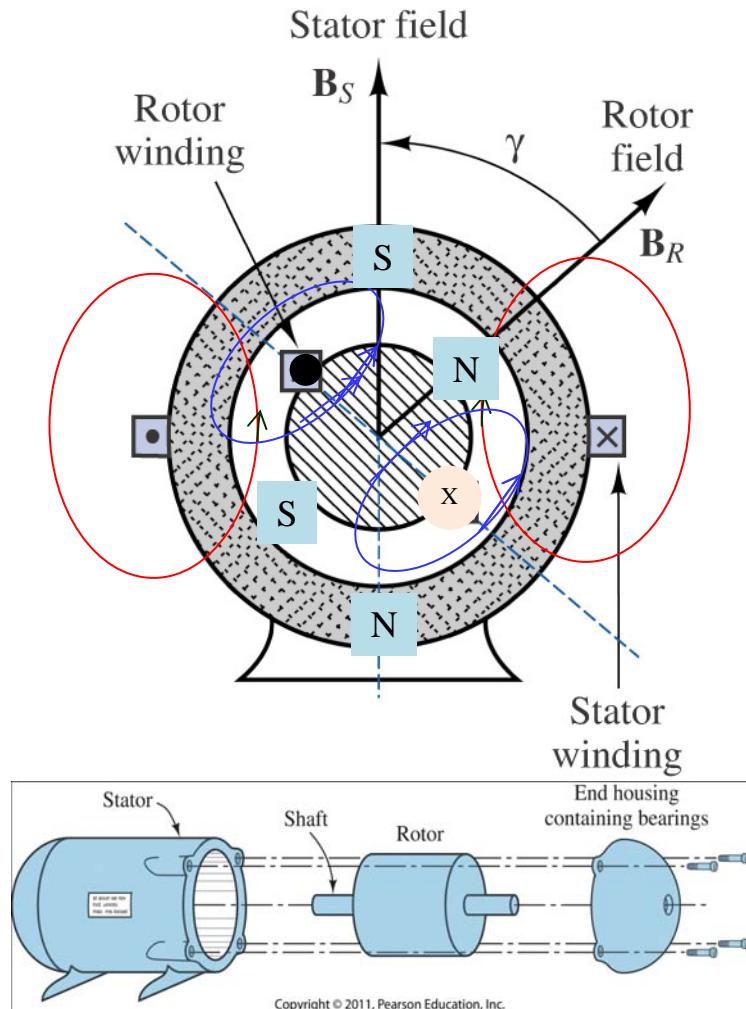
(a) rotating electrical machine cross sectional view and (b) An electrical motor consists of a cylindrical rotor that spins inside the stator.
